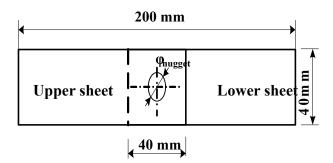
Dimensions of resistance spot-weld specimen (mm)
